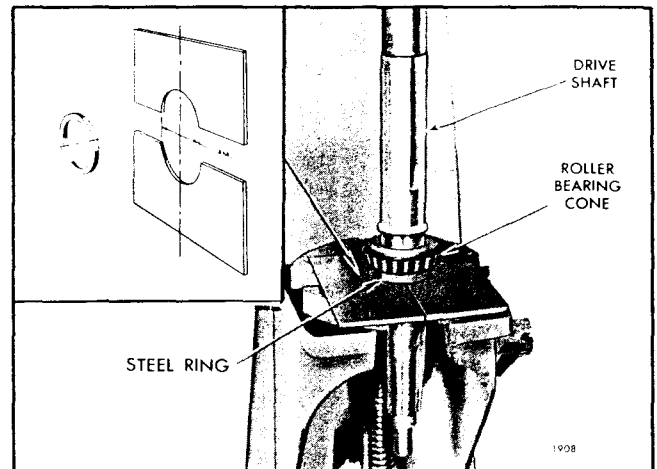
Installing Roller Bearing Cones On Clutch Drive Shaft
